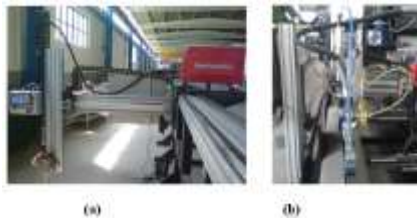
The designed welding manipulator a) initial version b) final version
